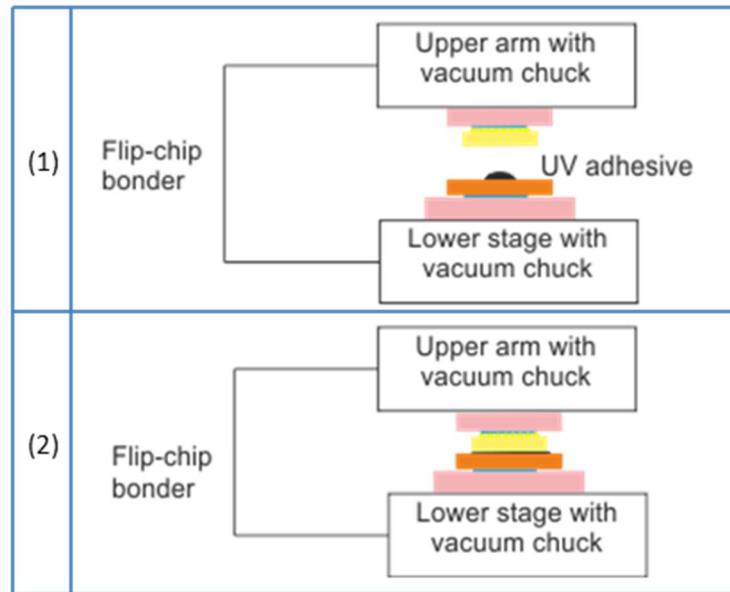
Steps for bonding of the devices: Step (1): loading and mounting the prepared assemblies of the microlens array and SPAD array chip in the upper arm and lower stage of the bonder respectively. Step (2): After the alignment is completed, the bonding cycle is initiated.
